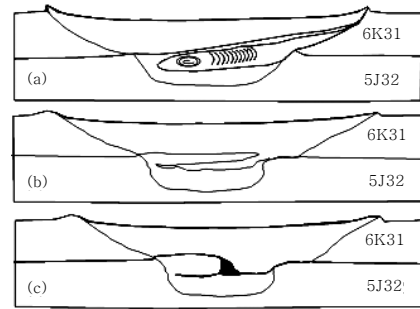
schematic diagram for shape of nugget zone with welding condition. (a) Onion-ring type (Type A), (b) Zigzag type (Type B) (c) Hooking type with void (Type C)
